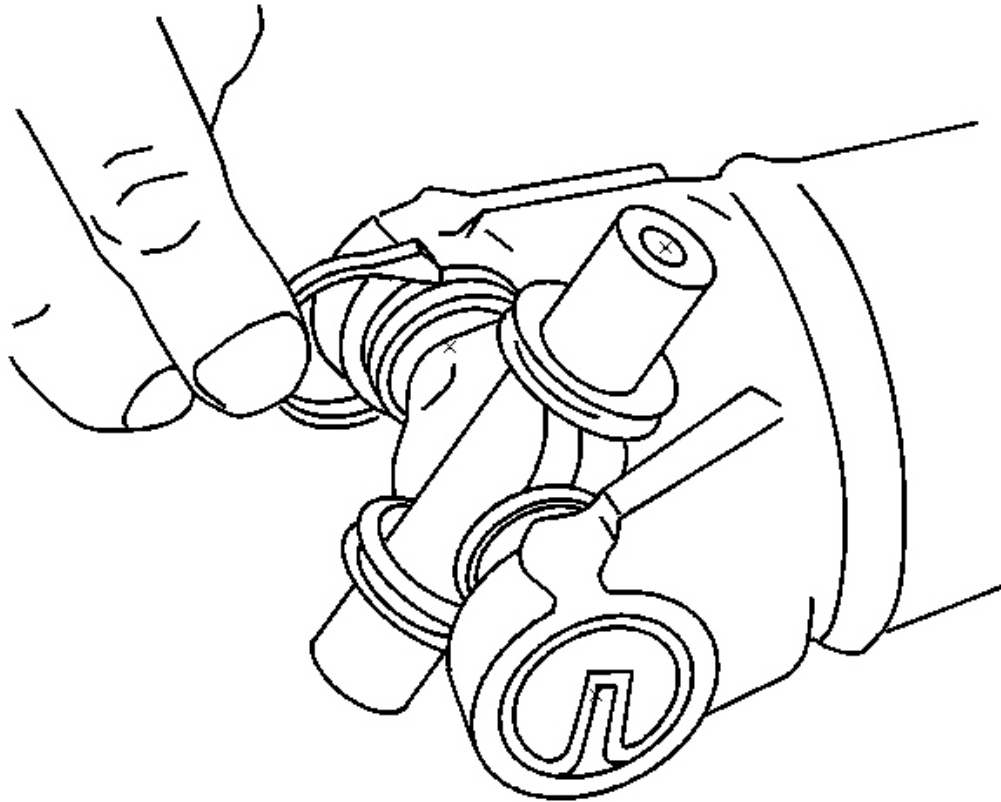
Assembling Bearing Retainer In Retainer Groove
